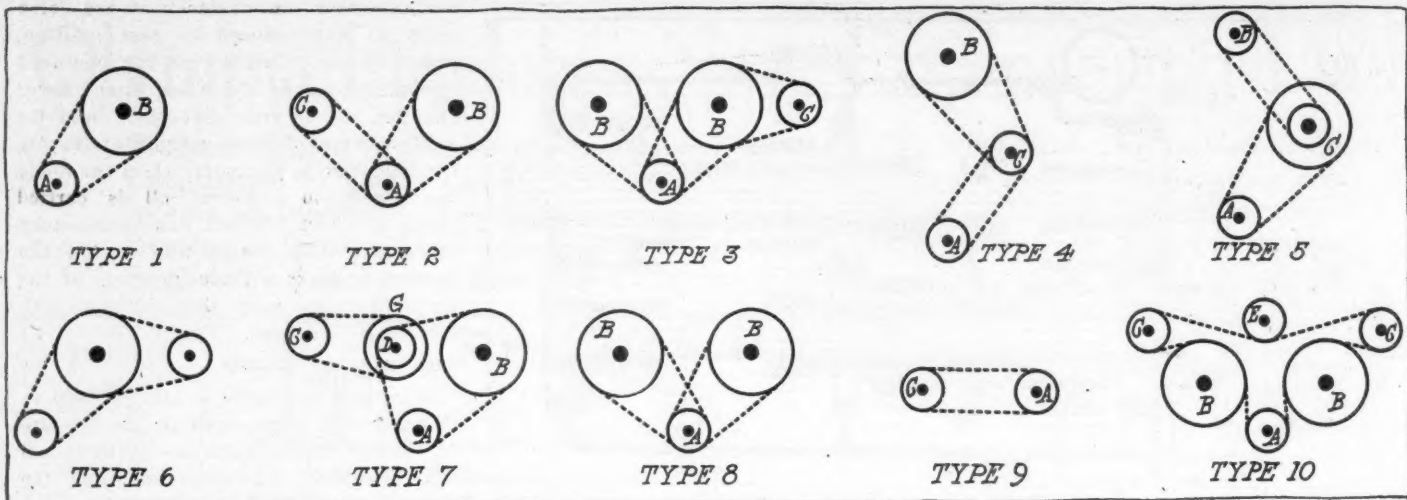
LEADING ARRANGEMENTS OF SILENT CHAINS FOR MOTOR USE ON ENGLISH CARS
